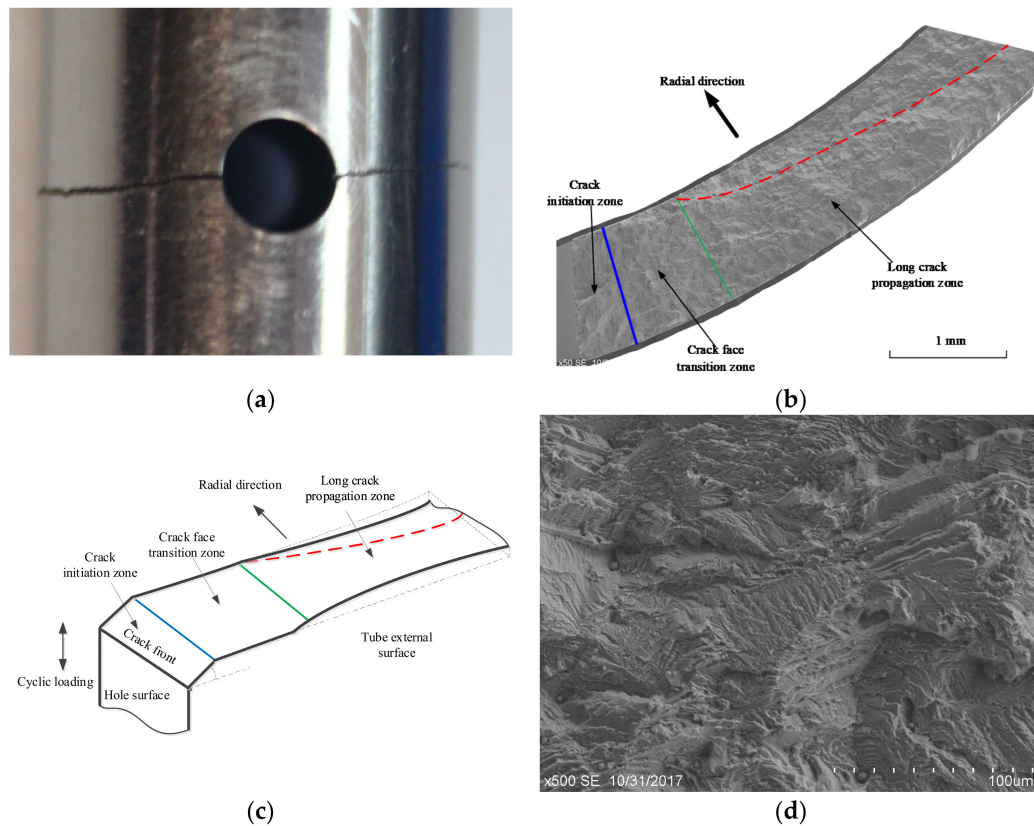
Fracture appearance for tube with holes: (a) Macroscopic view of the crack, (b) fracture appearance, (c) diagrammatic sketch, and (d) microscopic morphology.
